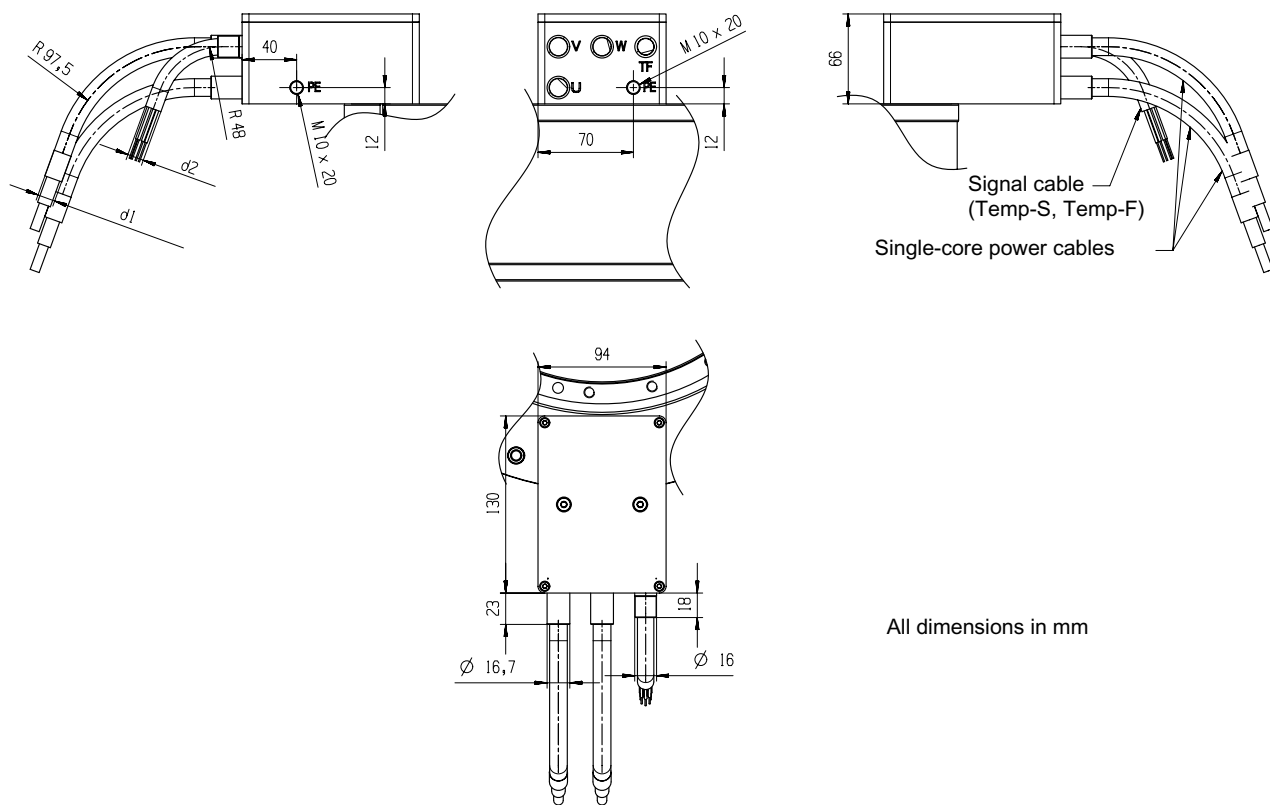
Radial electrical connection towards the outside with sleeve and single core for 1FW6160, 1FW6190 and 1FW6230, 25 mm² core cross-section
